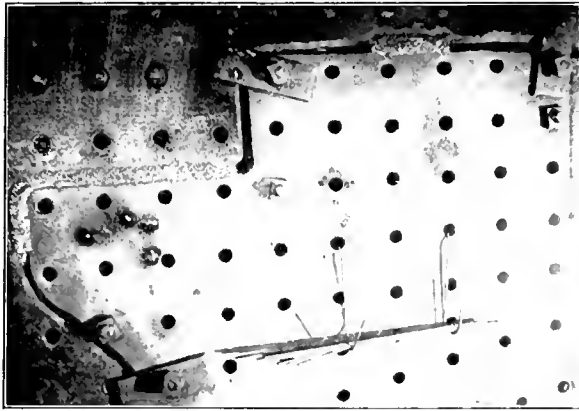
A Firebox Patch Tacked in Place for Arc Welding
